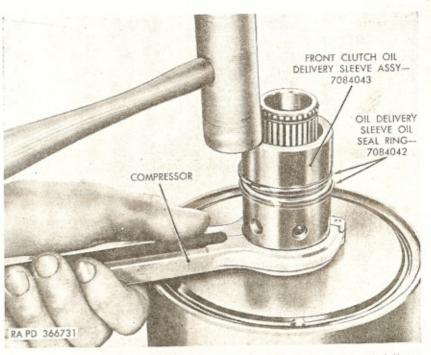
Using compressor—A266328 to install front clutch oil delivery sleeve assembly.
